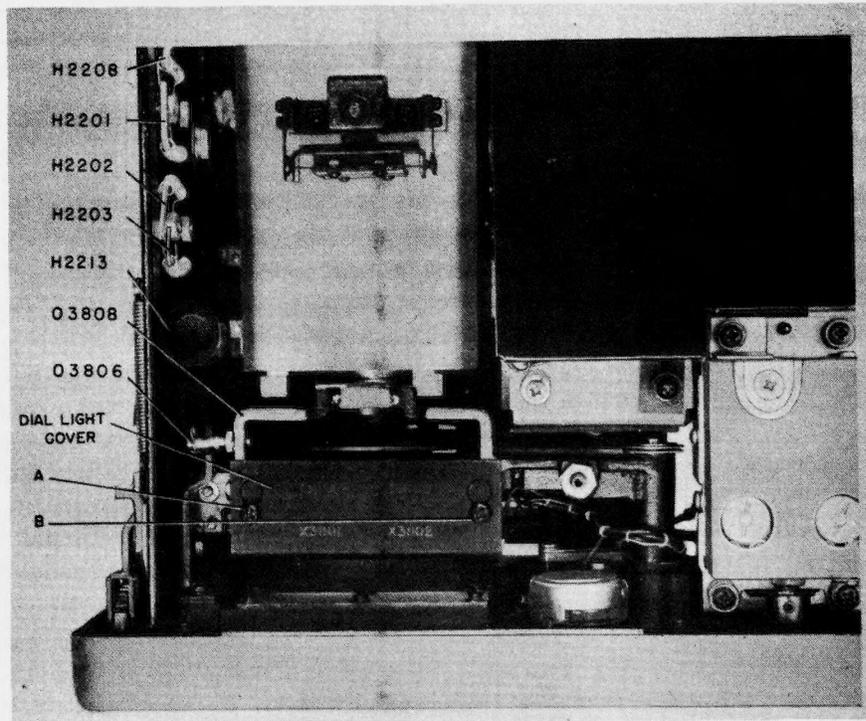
Lens-Arm Assembly and Dial Light Compartment, Top View
